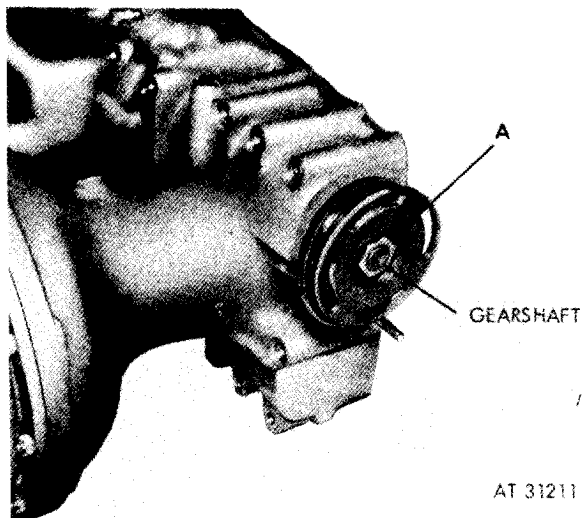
Removing or installing fuel injection pump splined drive coupler attaching parts.
